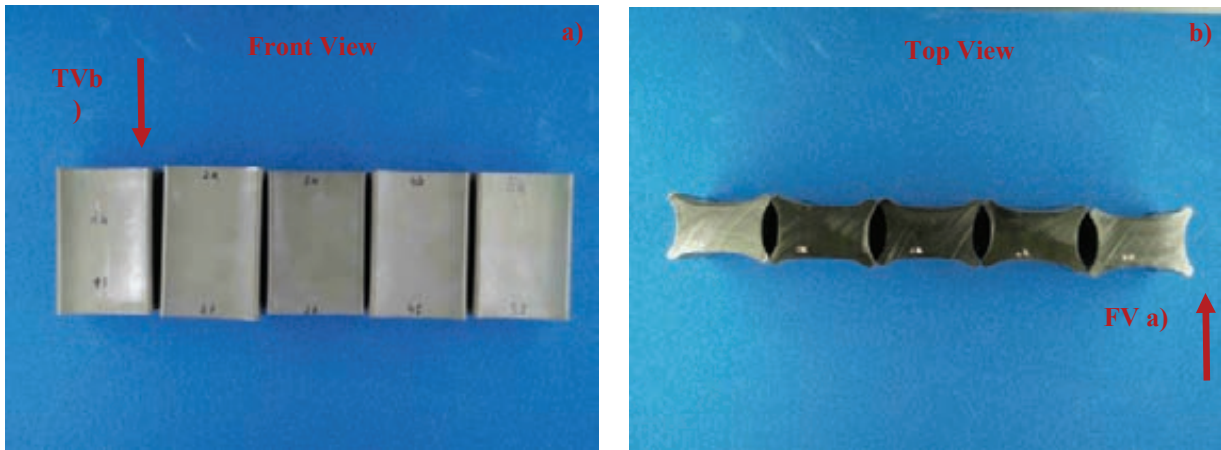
HIP capsules after hot-isostatic pressing and cutting off bottom and top cap.
